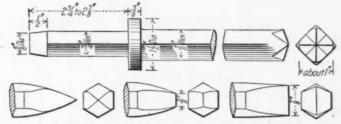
FORMS OF MOILS USED WITH A PNEUMATIC TOOL
